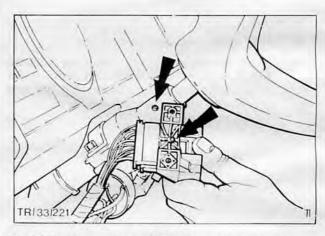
Peg (arrowed) on switch locates in hole in steering column (arrowed)
